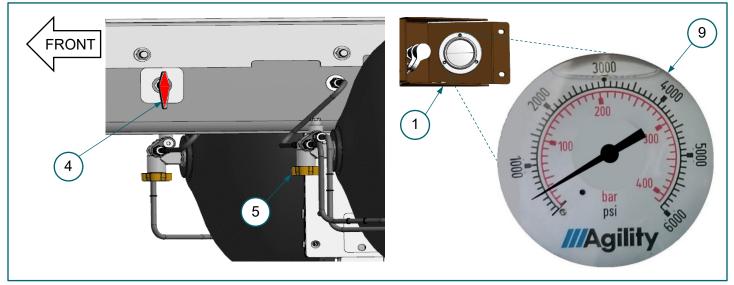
Fuel fill panel, (9) HP gauge reading 500 psi, (4) 1/4-turn manual shutoff valve, (5) DS cylinder manual valve
